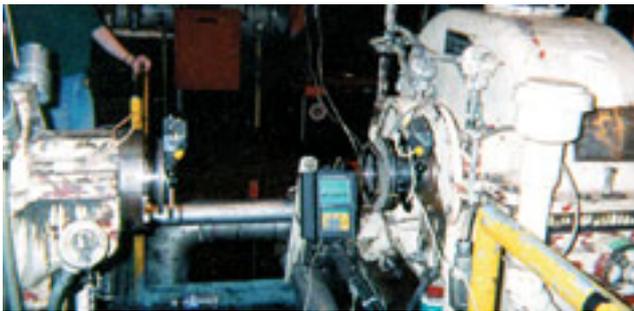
Coupling 2, between the main feed pump and the gearbox
